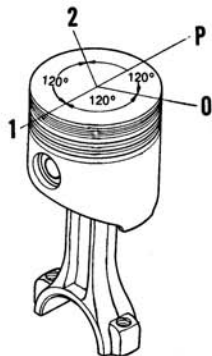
Position piston ring and gaps as shown around piston pin (P) centerline.
